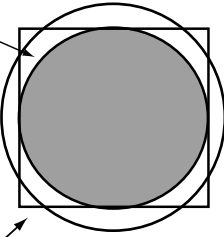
Footprint - 3 mils stencil - solder mask defined
